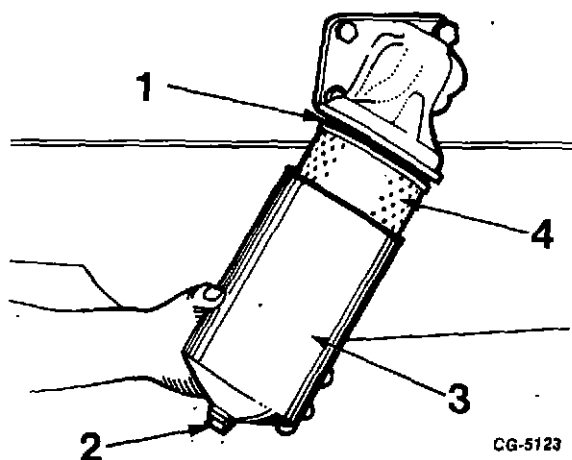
REPLACEABLE ELEMENT-TYPE FILTER
